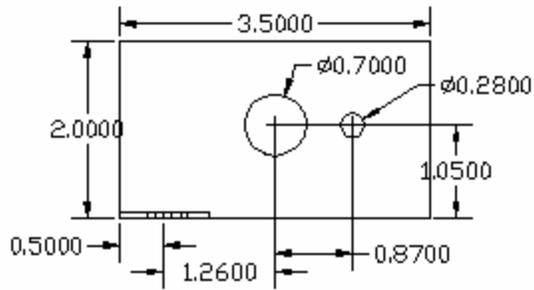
RPM sensor mounting bracket, side dimensions.
